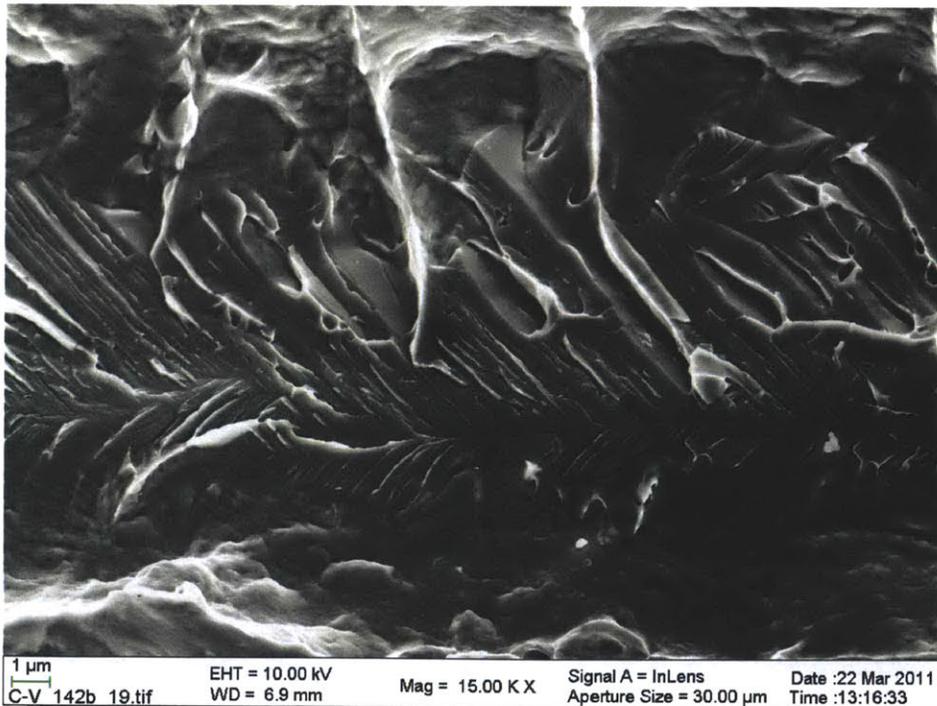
As-welded Charpy-V specimen, tested at 288°C fractograph showing ductile austenite and brittle δ -ferrite exhibiting chevron type cleavage patterns.
